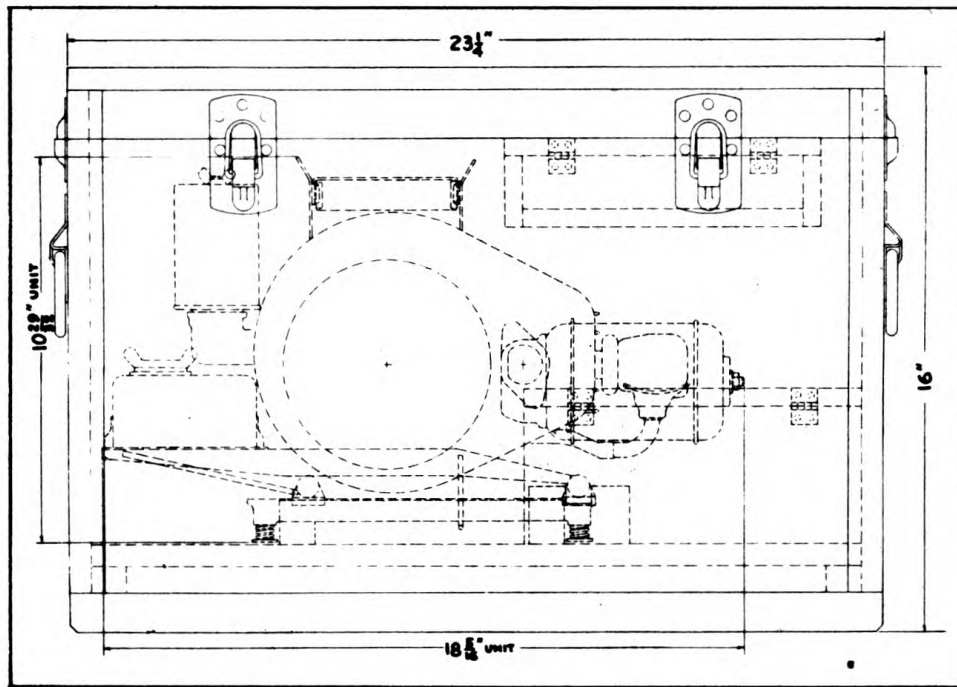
POWER UNIT PE-214-A—OVERALL DIMENSIONS
